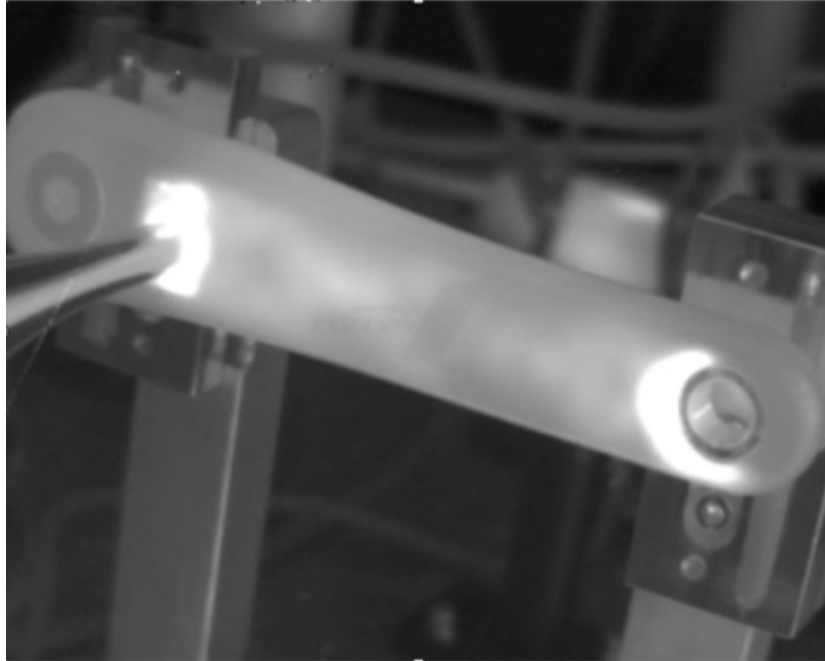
A very clear disbonded area can be seen around the pedal spindle (right). This defect formed a crescent shape, starting closest to the pedal spindle insert, and radiated outward. Crank arm F9731
